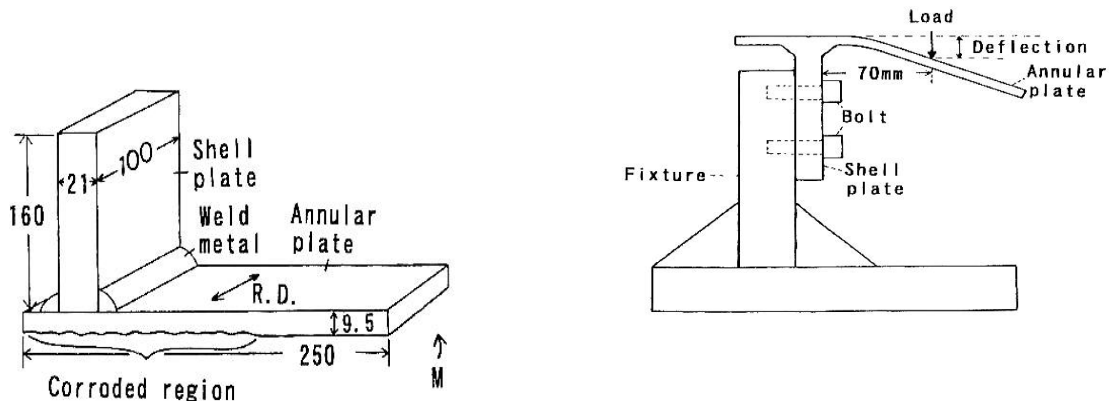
Geometry of L-shaped bend specimen. Fig.2. Schematic illustration of setup for bend test (dimensions in mm).
